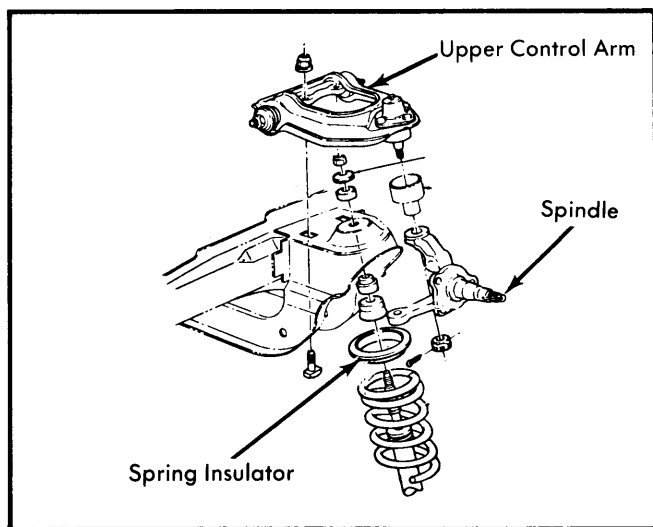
Exploded View of Pinto & Bobcat Lower Control Arm Assembly
